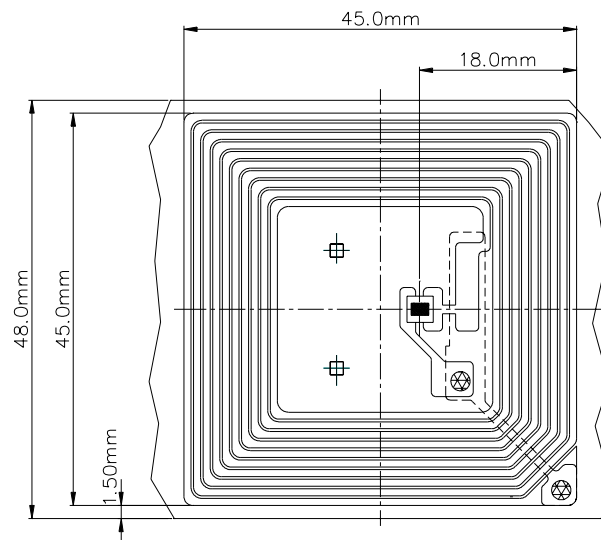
Dimensions of RI-I02-110A, RI-I12-110A
